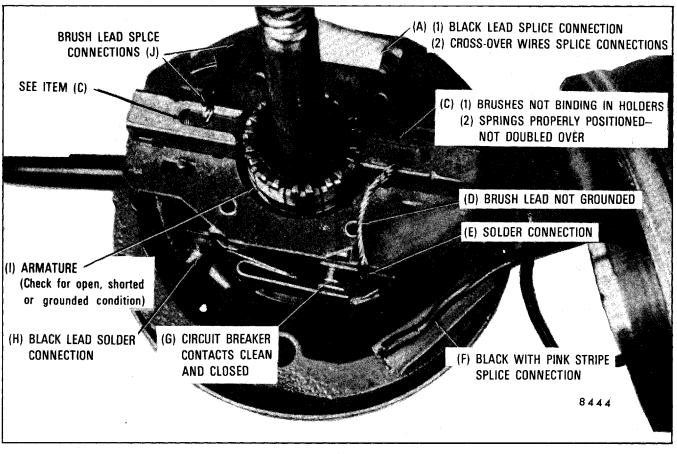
Visual Inspection Modified Pulse Motor
